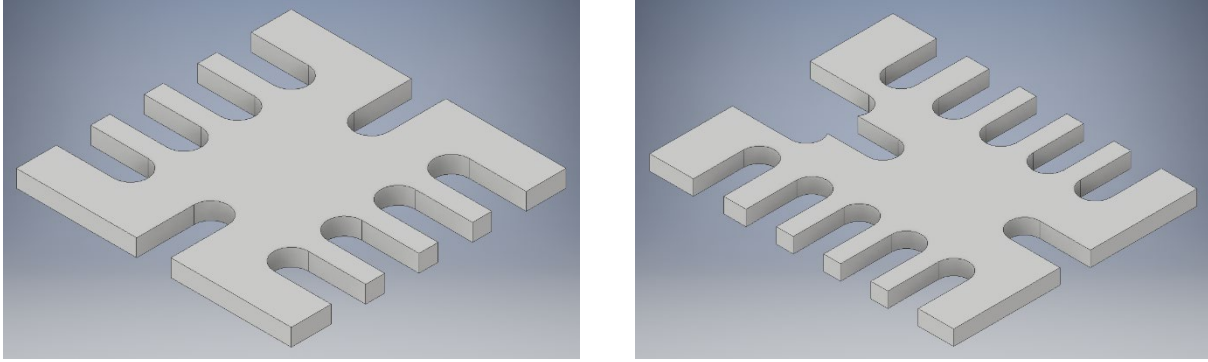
Reinforcement spacers for control wall (left) and optimized wall (right)
